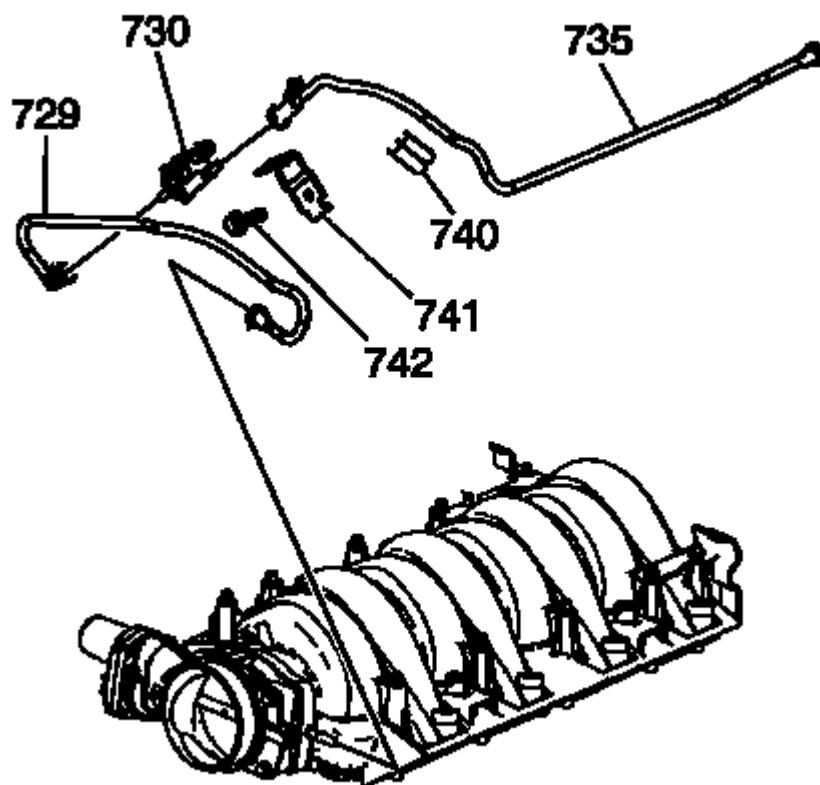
EVAP Canister Purge Solenoid Valve, Bracket And Tubes
